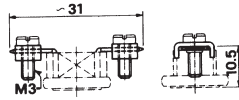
Clamping straps for conductors up to 2.5 mm²
